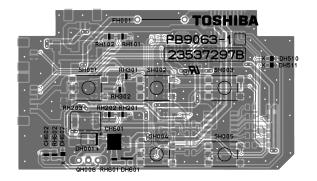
U0031 CAM Switch PC Board (Top Side)
